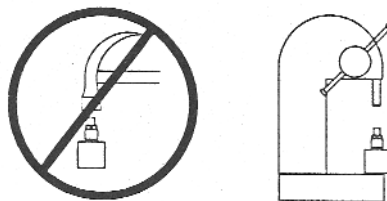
How NOT to Insert the Shaft Into the Internal Magnet
